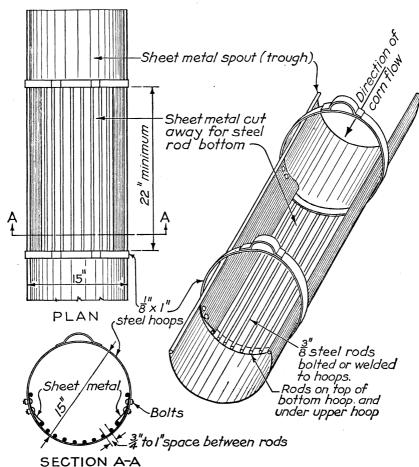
Section of spouting of grain chute equipped with rod-bottom separator, by use of which the ear corn passes into the crib and the shelled corn, chaff, and dirt is removed.
